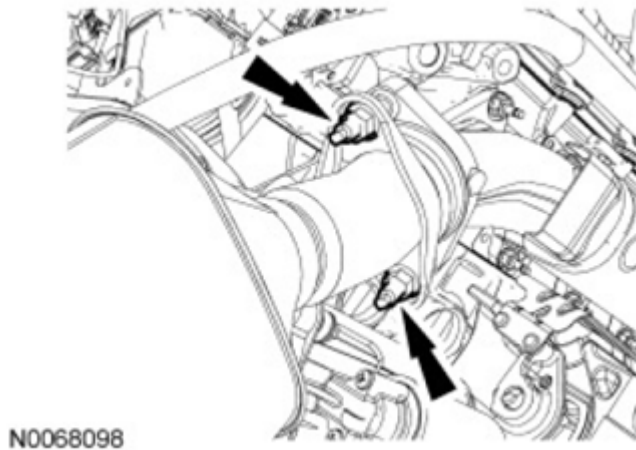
Locating Exhaust Y-pipe Flange Nuts
